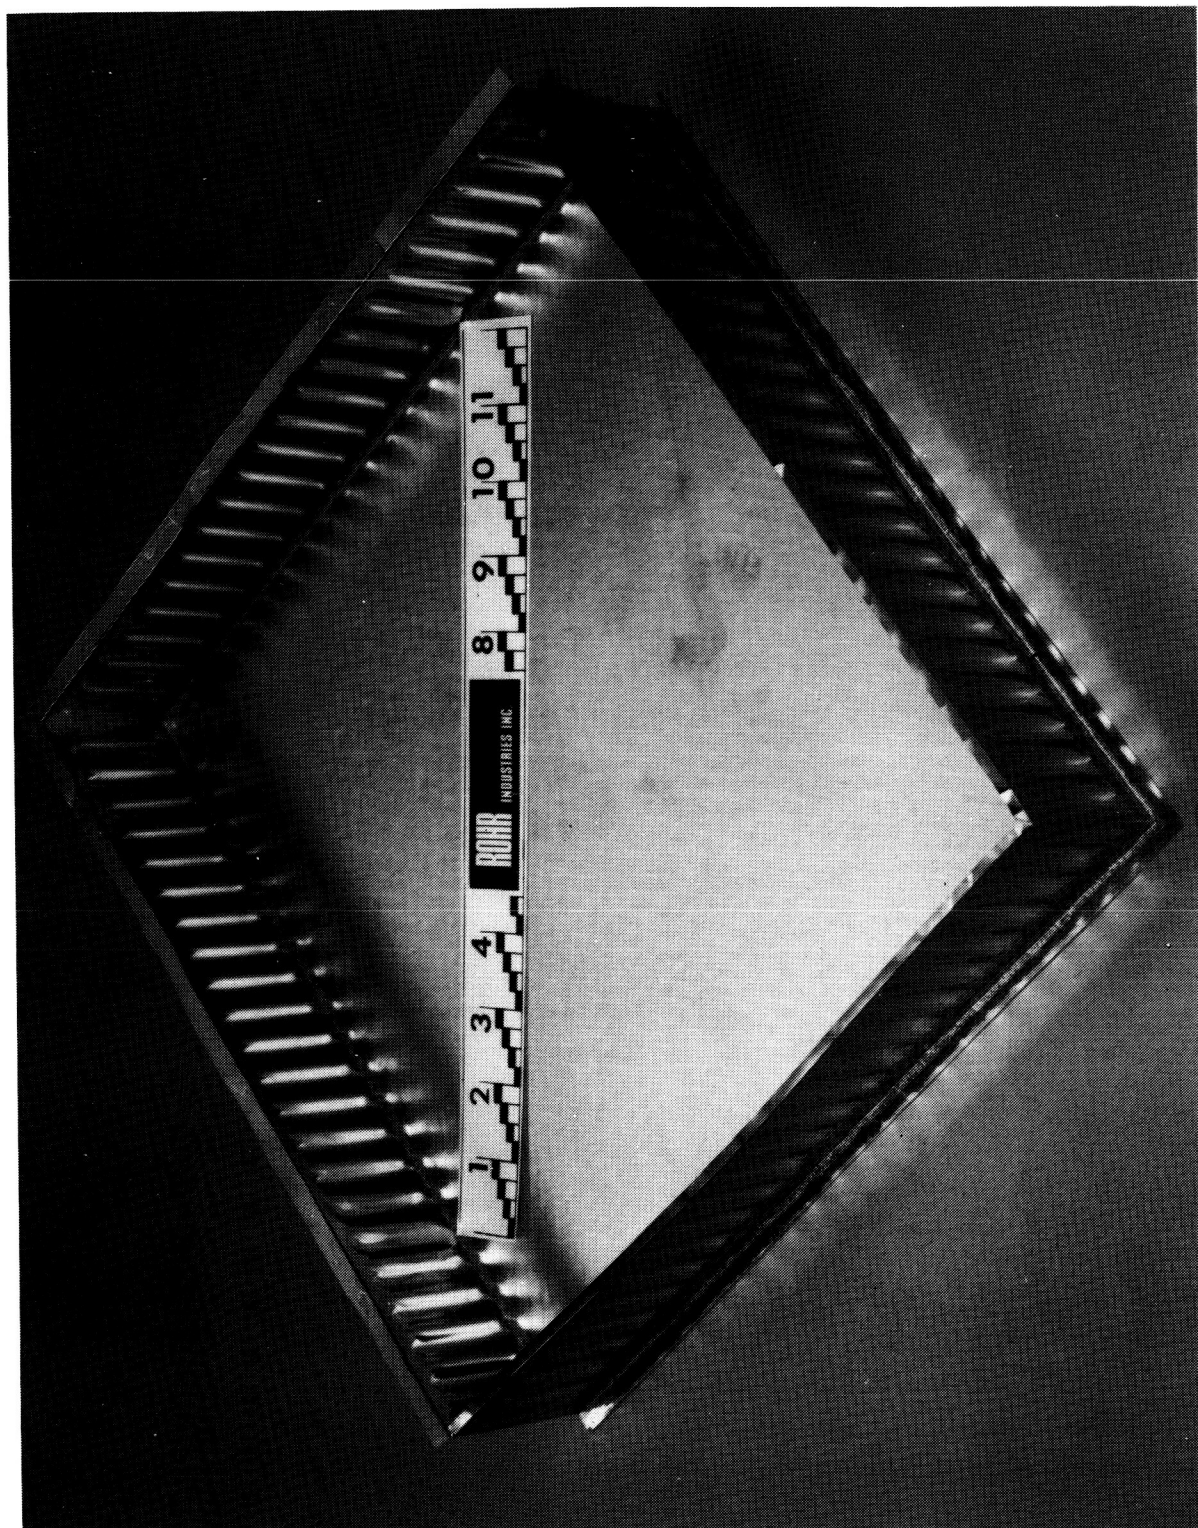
INCONEL 617 Subassembly after Brazing/Diffusion Bonding
